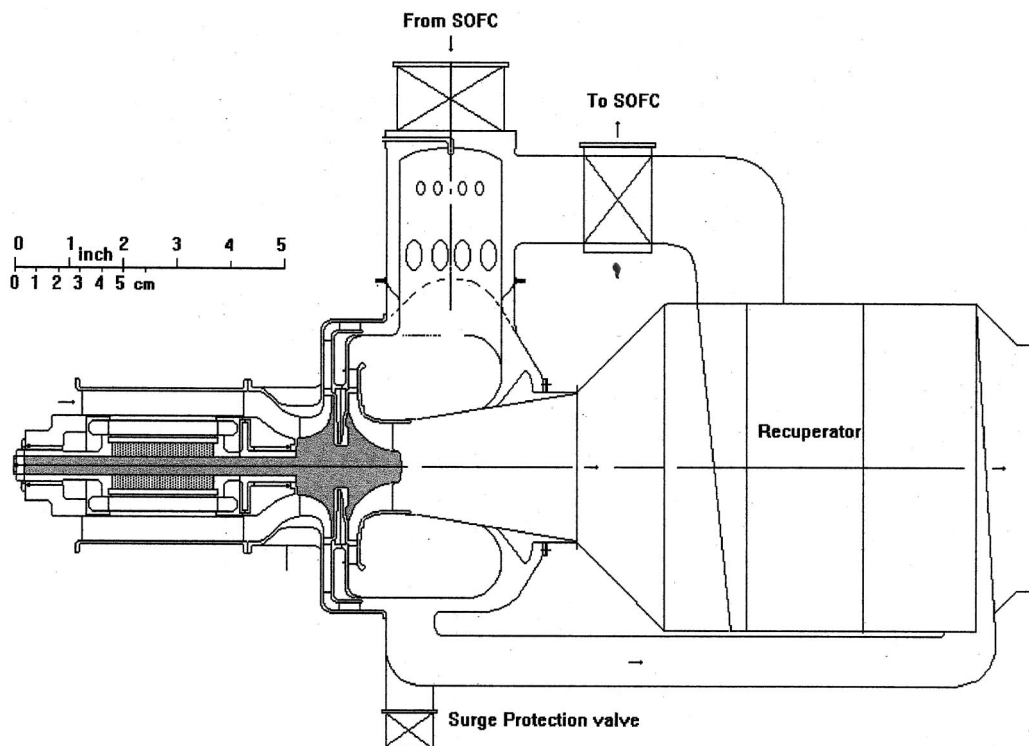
Alternate 5-kW personal turbine design concept with rear-mounted recuperator and can combustor
